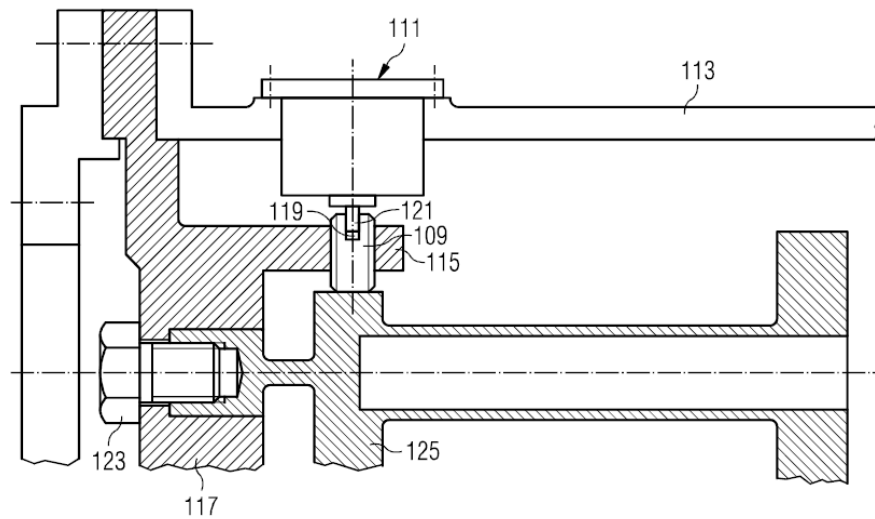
, Remotely Operated Balancing Sleeve Design for internal application
